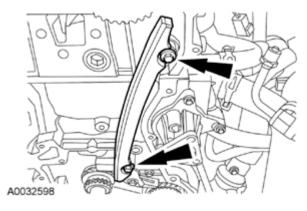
Locating Timing Chain Guide Bolts Courtesy of FORD MOTOR CO.
